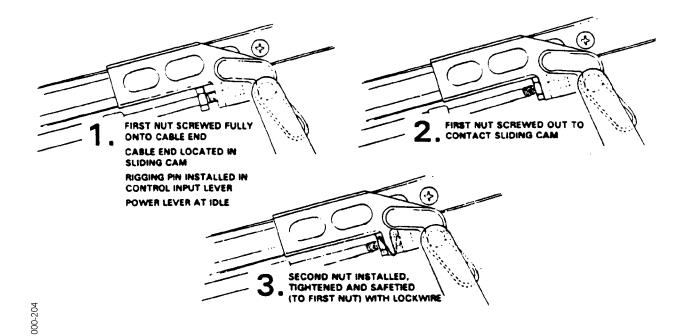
Power Control Cable to Sliding Cam - Attachment Details
